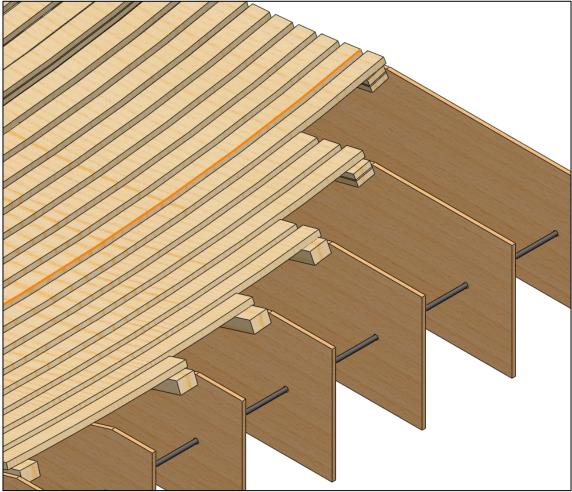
Close up of wooden slats and structural ribs sitting in mold
